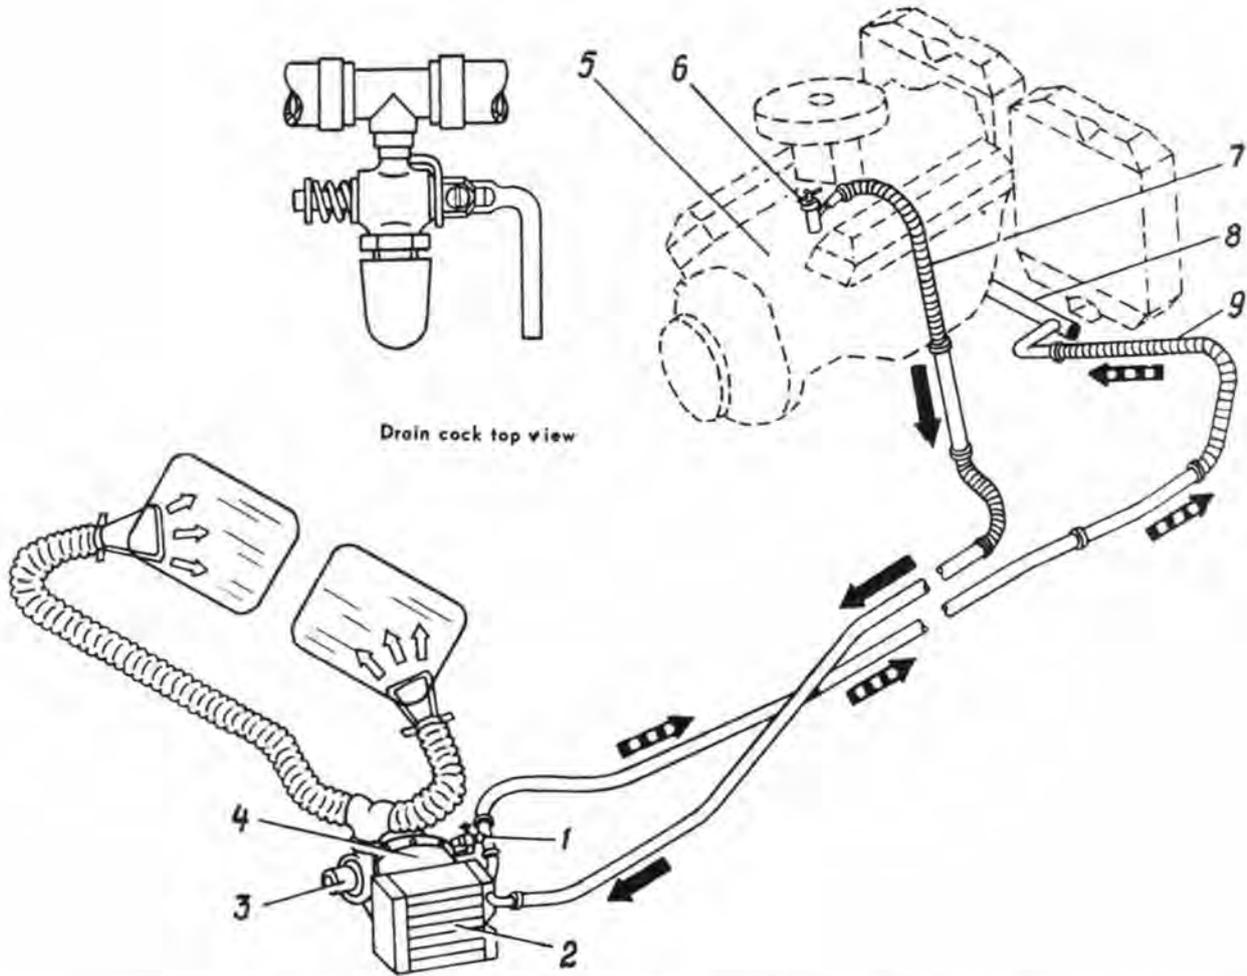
VEHICLE HEATING AND WINDSHIELD DEFROSTER SYSTEM
